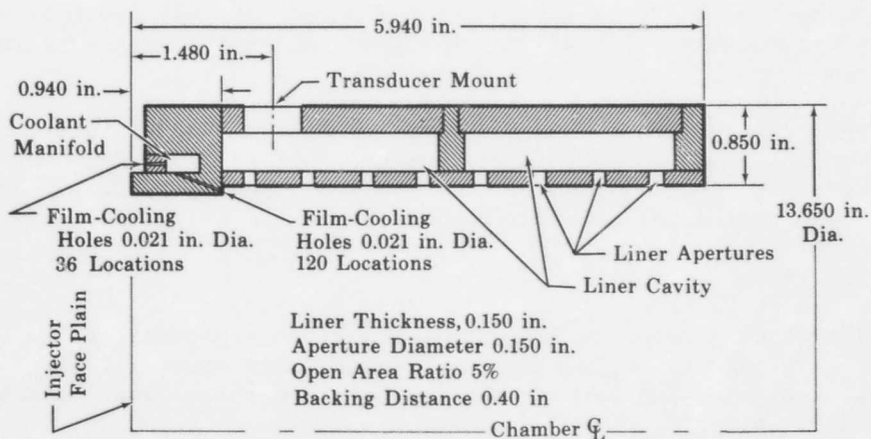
Sketch of the 200-psi Film-Cooled Liner Assembly
